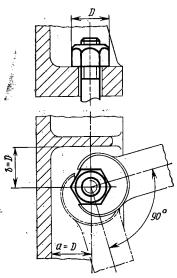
Tightening with open-ended spanner swung through 90° in a corner
